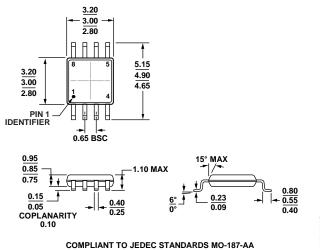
8-Lead Mini Small Outline Package [MSOP] (RM-8) Dimensions shown in millimeters
